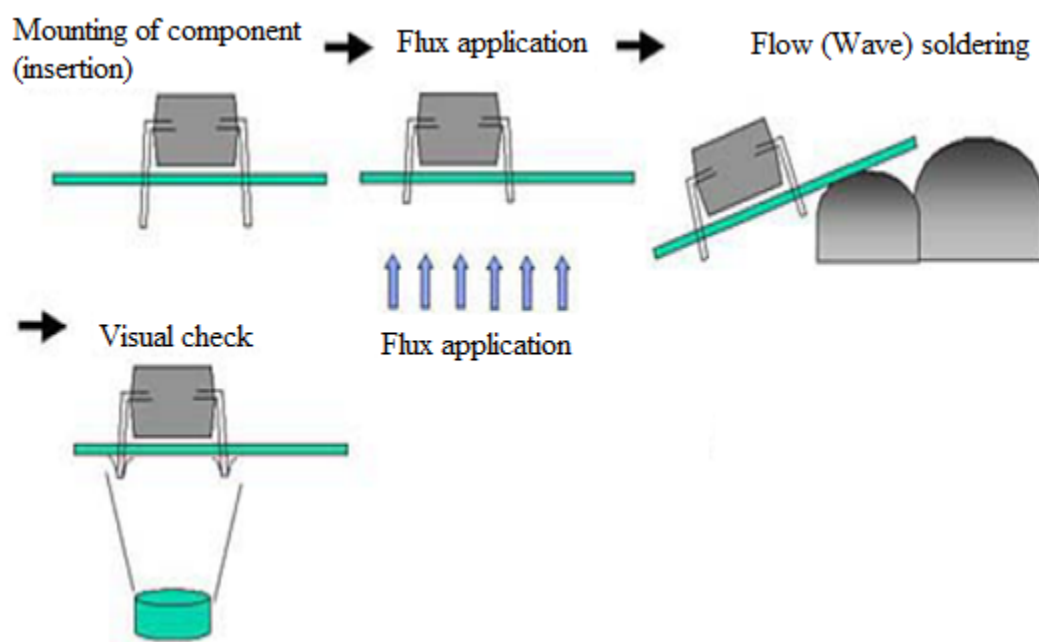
Process description of wave soldering with through-hole component. After the leads of the components are inserted to the holes on the board and flux has been applied, a molten wave of solder is applied to form solder joints (NEC, 2000).
